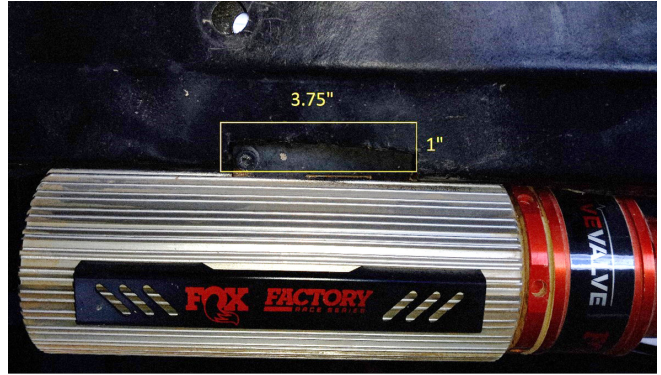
Section to cut on each respective side of the truck from the fender liner.
